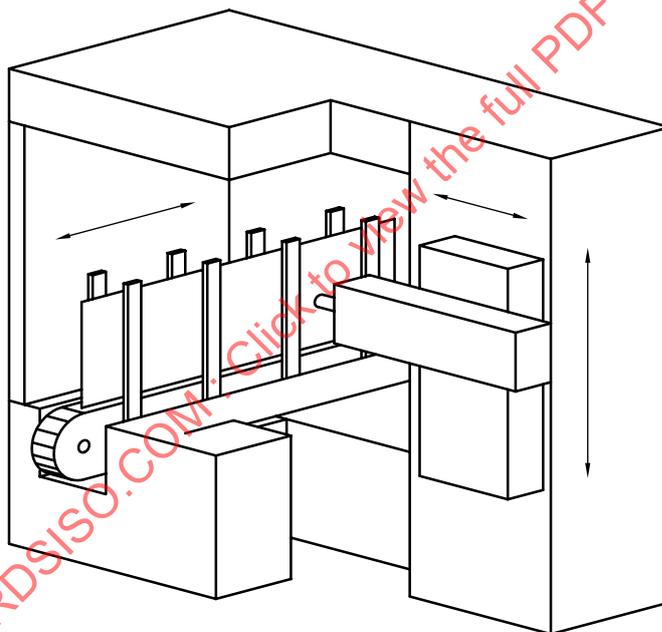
Example of a through-feed vertical machine with moving workpiece, fixed frame, moving machining head
